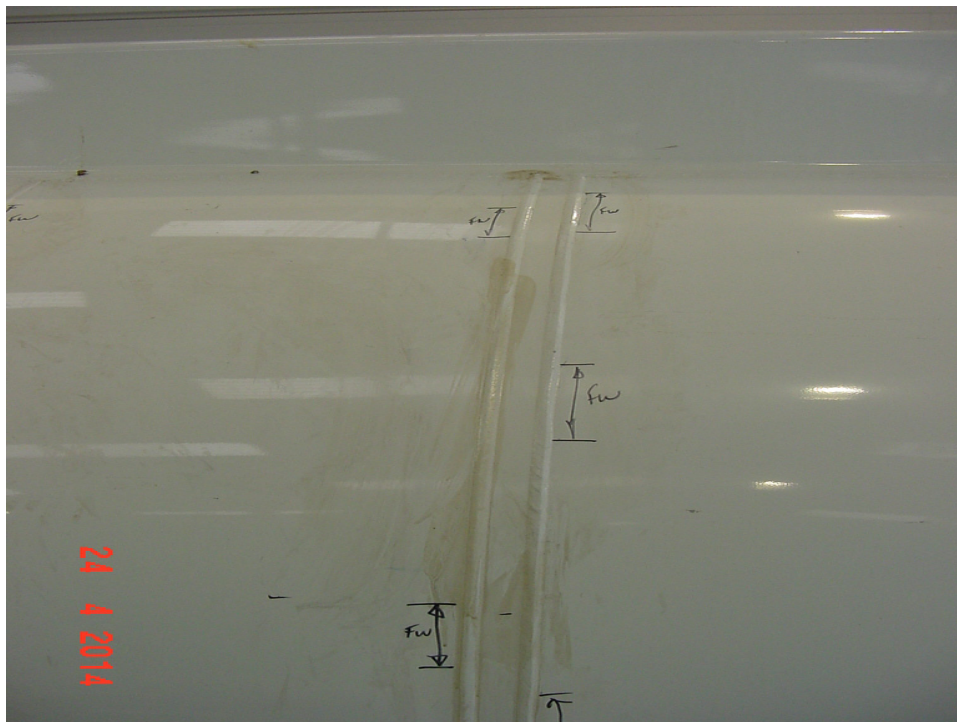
Offside (labelled right-hand side, RHS), Band E.
